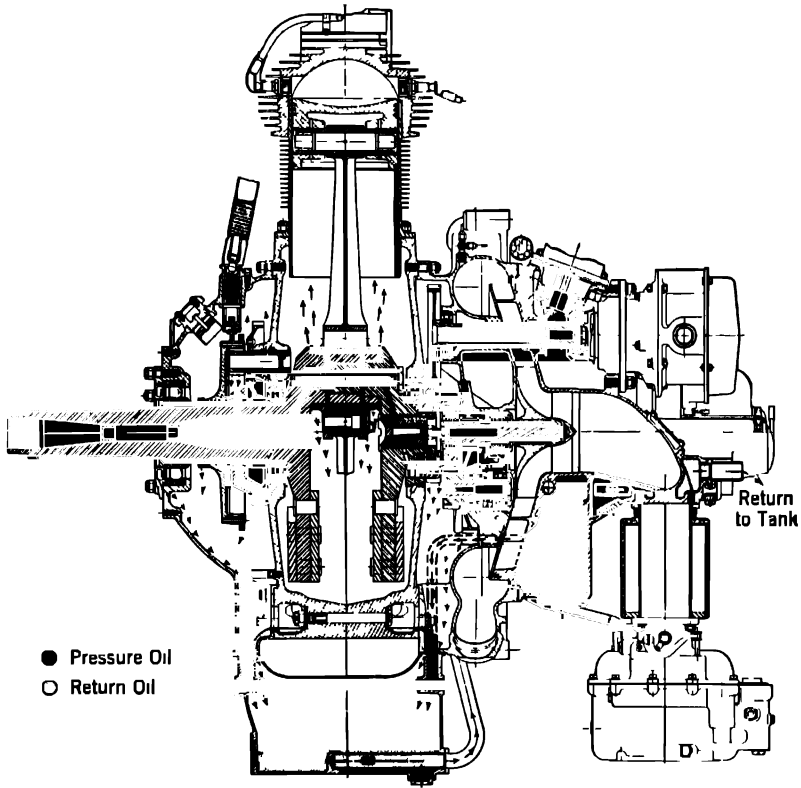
Lubrication Chart of Pratt & Whitney Engines.
